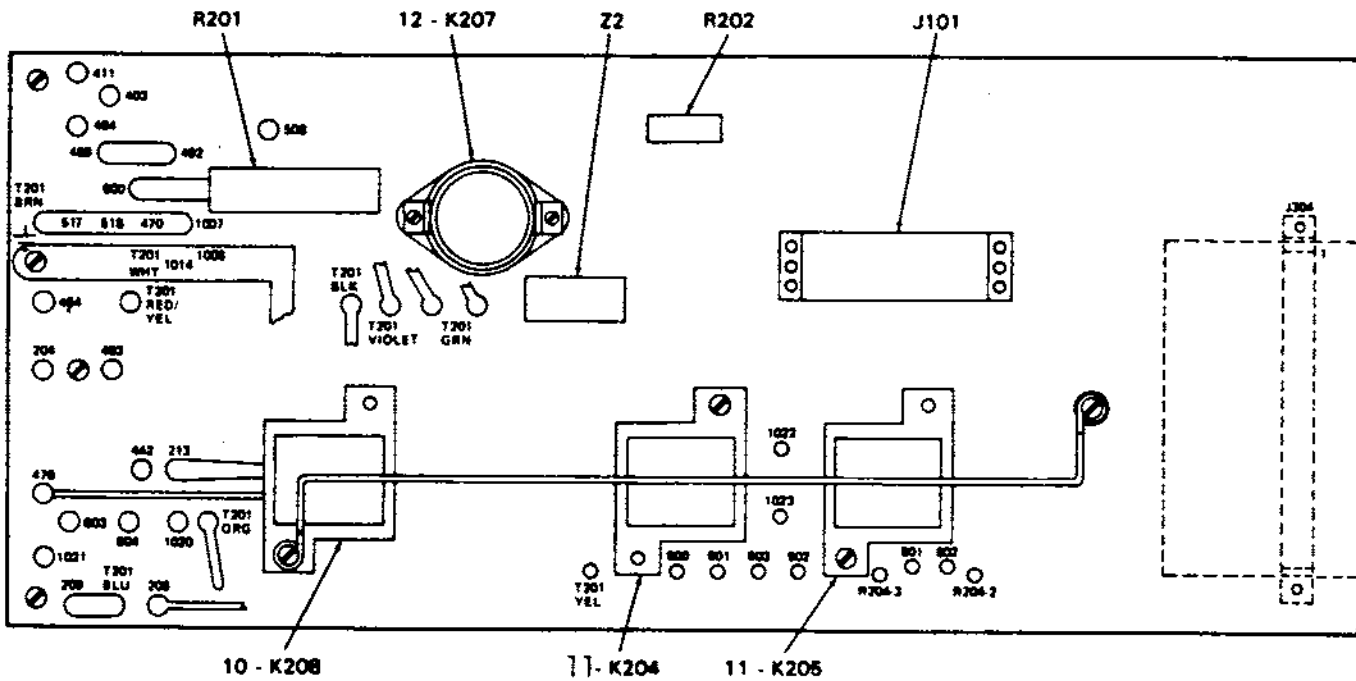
RC-5B Parts Location: P.C. Assembly 12370, (SN 7809417 and Higher)
